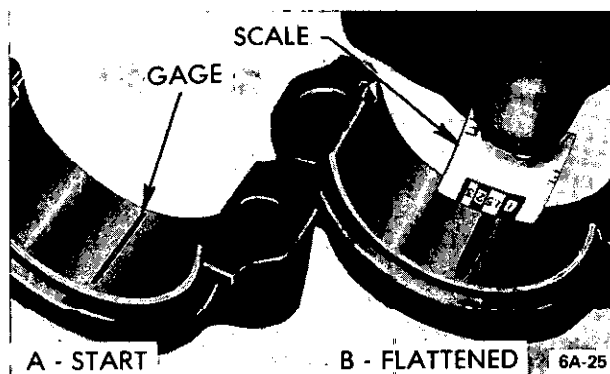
A-25 Checking Bearing Clearance With Plastic-Type Gauge
